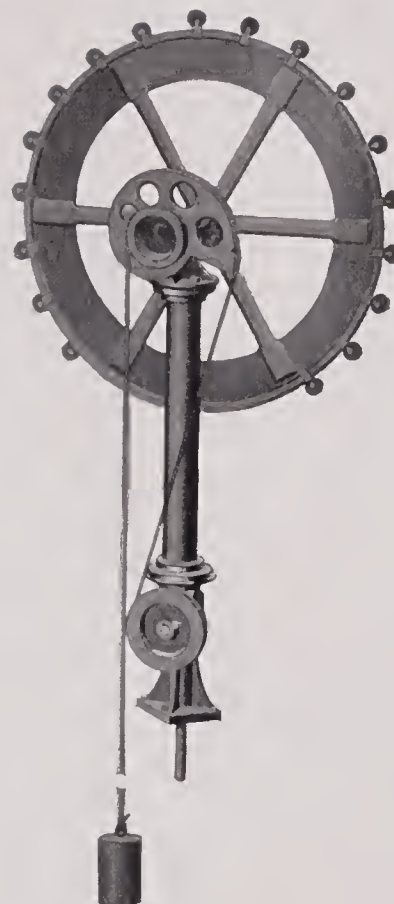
shows our Dial Indicator particularly adapted to drum hoists where the length of rope wound on the drum is constant for each revolution. This indicator may be driven either by a link belt from a sprocket wheel on the drum, or by gearing from the drum.
